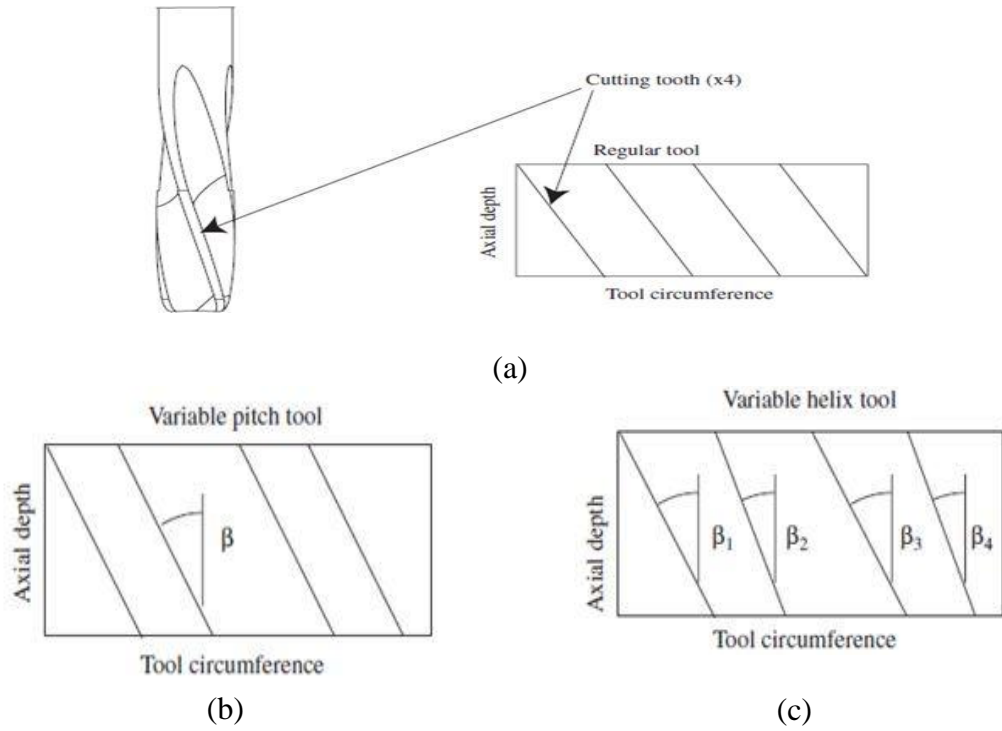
Milling tool geometry; (a) Uniform tool, (b) variable pitch tool and (c) variable helix tool
